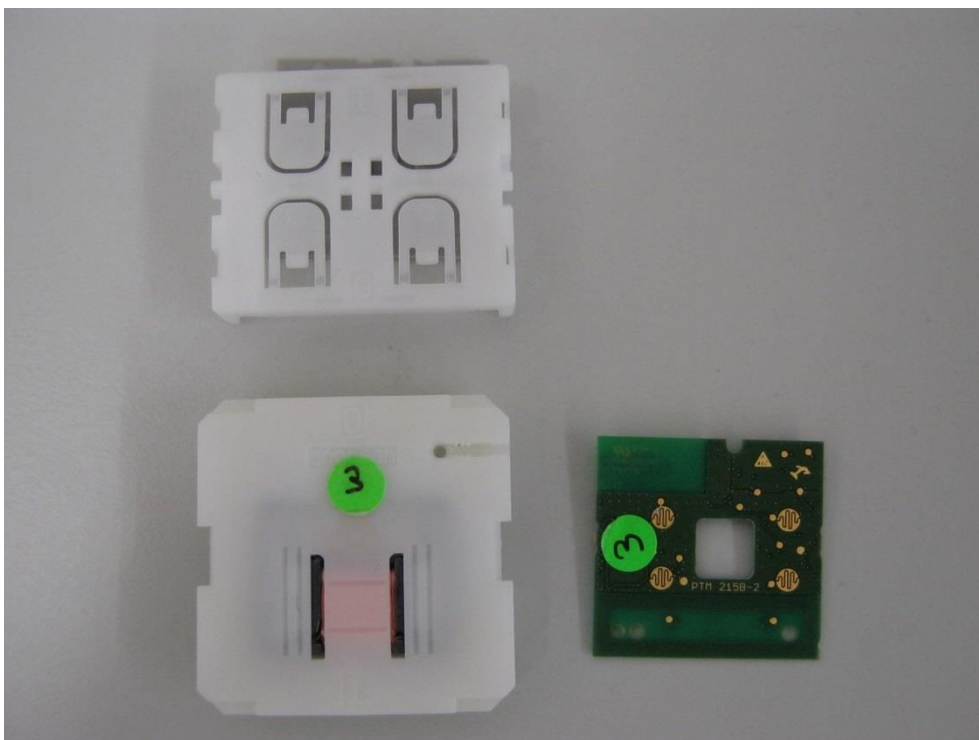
EUT #3 (not tested) – Disassembled - Top view
